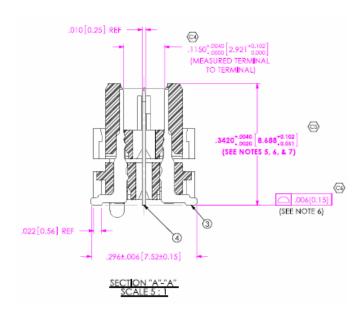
ASP-129637-03 or equivalent Mechanical Drawings (Reference Only)
